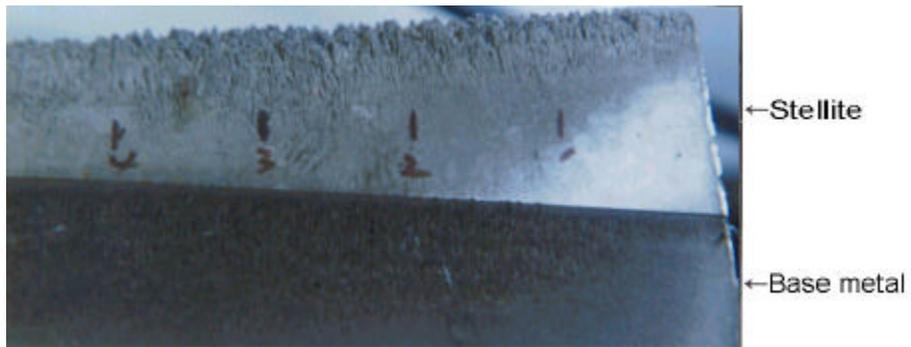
Appearance of impingement erosion-corrosion for turbine blade
